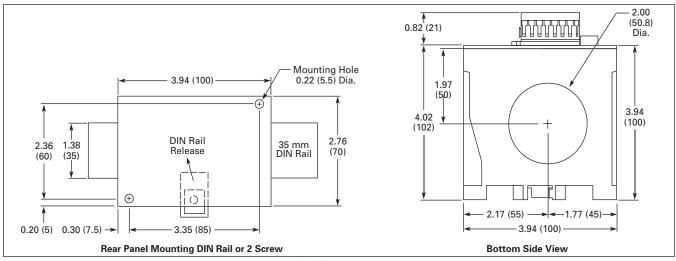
D64RPB100 — Approximate Dimensions in Inches (mm)
